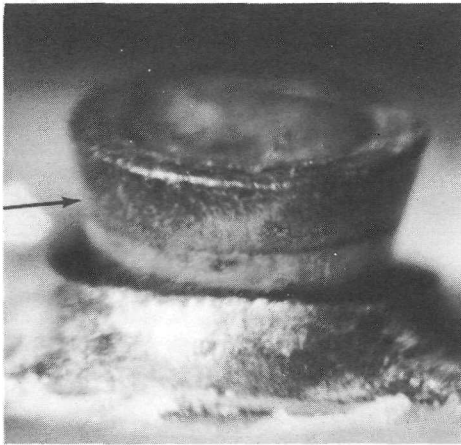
Push tested gold-plated terminal exhibiting solder separation. (25X magnification)
